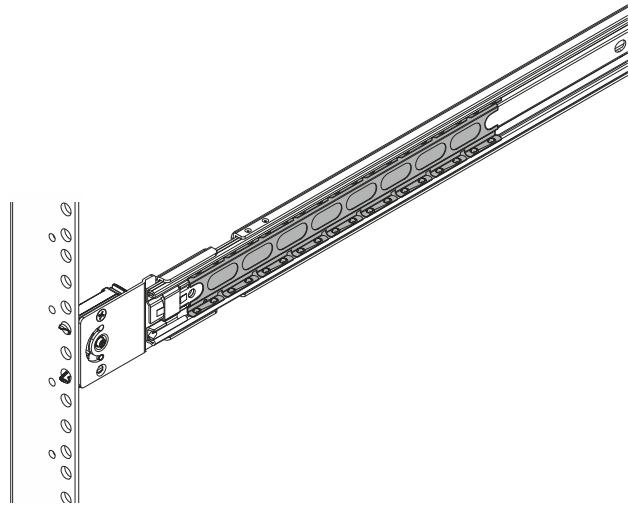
Inserting Rail Alignment Posts into Front Channel Holes
